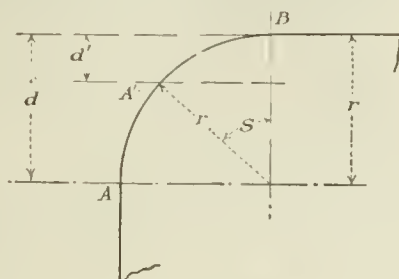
DIAGRAM OF ROUNDED CORNER OF FACE-MILL BLADE OR TOOTH
